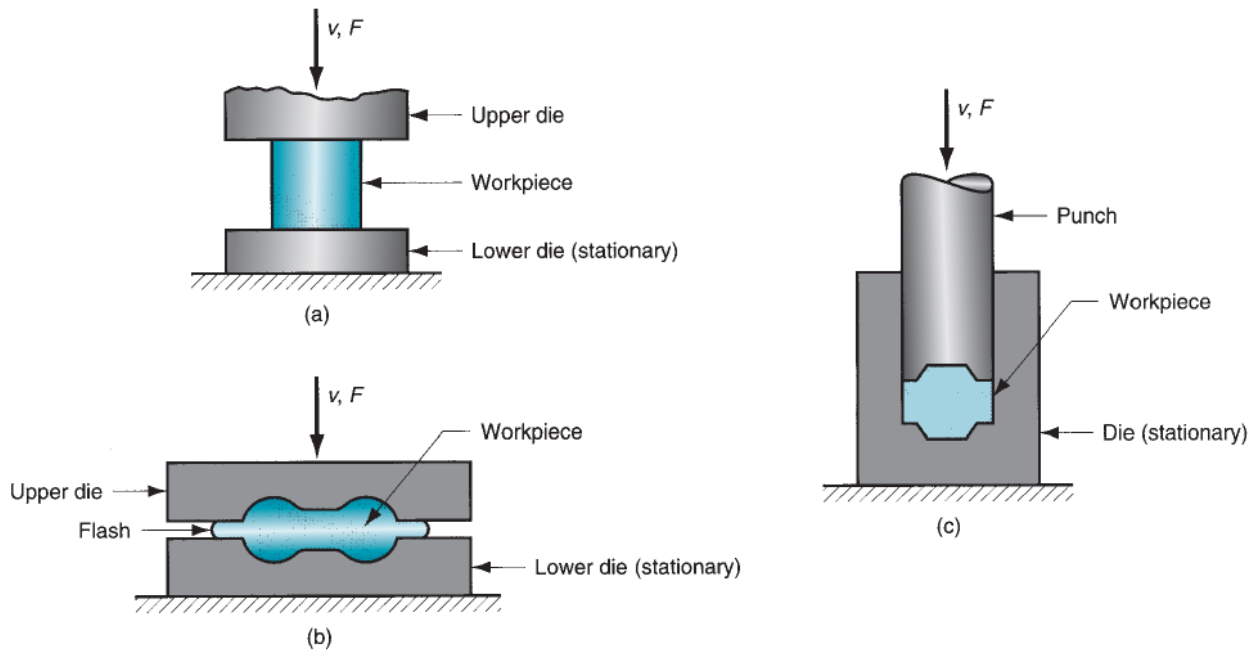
Three types of forging operation: (a) open-die forging, (b) impression-die forging, and (c) flashless forging.
